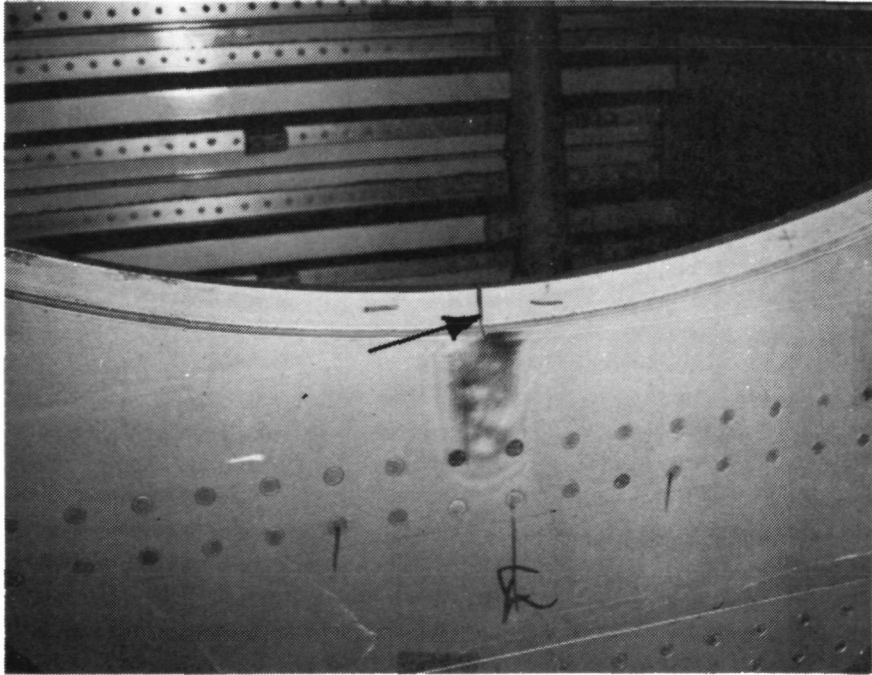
CUT BESIDE LOWER SURFACE ACCESS DOOR -
